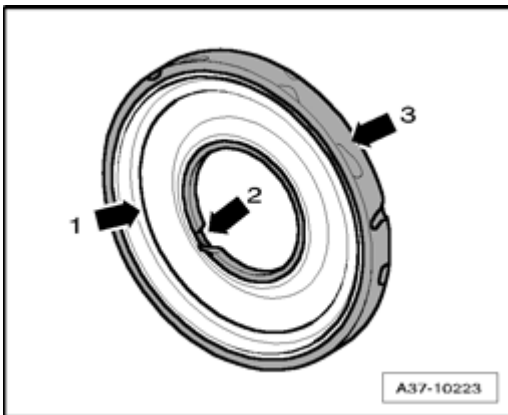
Checking Piston "F" For Deformation Or Damaged Sealing Lips
